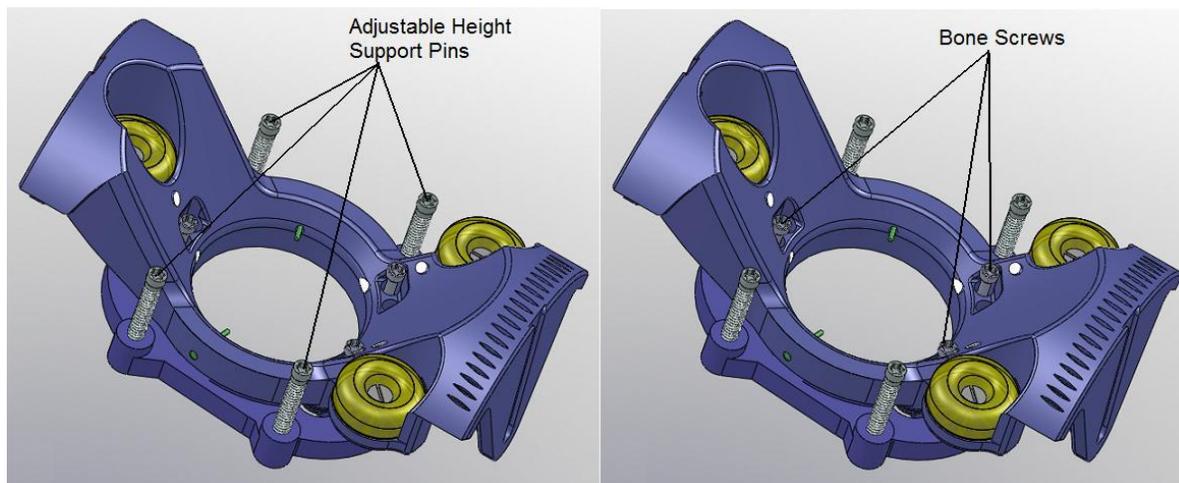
Adjustable Height Support Pins and Bone Screws for the Scalp Mount Base
